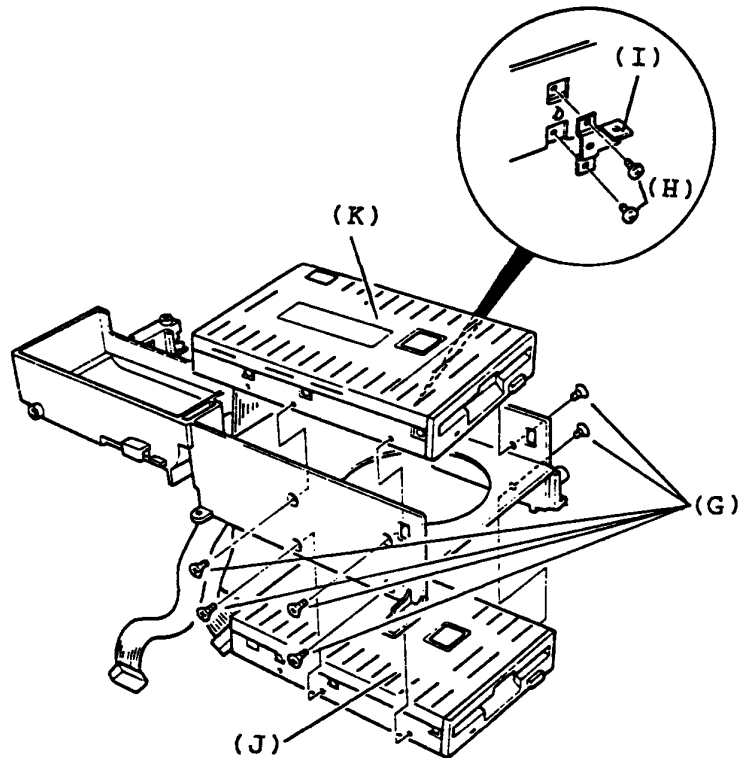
Floppy Disk Drive Removal (F/F type)
